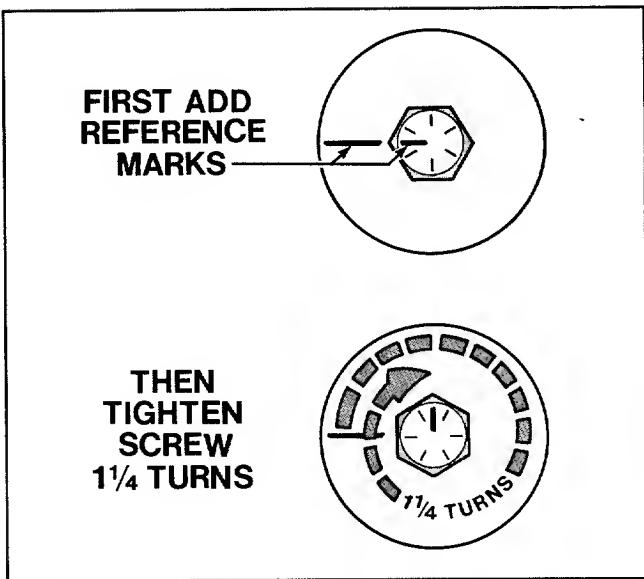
If you do not have a torque wrench, tighten mounting screw as shown above.
